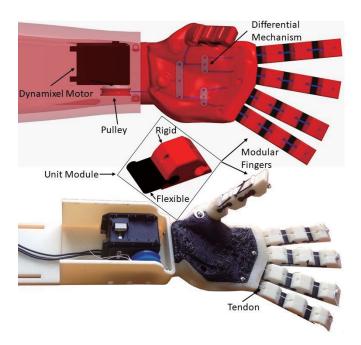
On top: the CAD design of the tendon driven modular soft prosthetic hand is shown. The hand consists of single motor, differential mechanism and modular fingers. Each module is composed of soft joint and rigid link. On bottom: 3D printed prototype of the soft prosthetic hand. The soft joints are realized in Ninjaflex material while the rigid parts are printed with ABS material.
